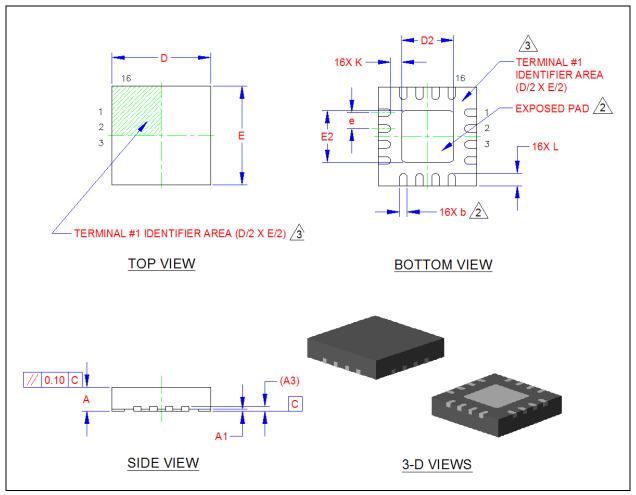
16-Pin QFN 4mm x 4mm Package Drawing
